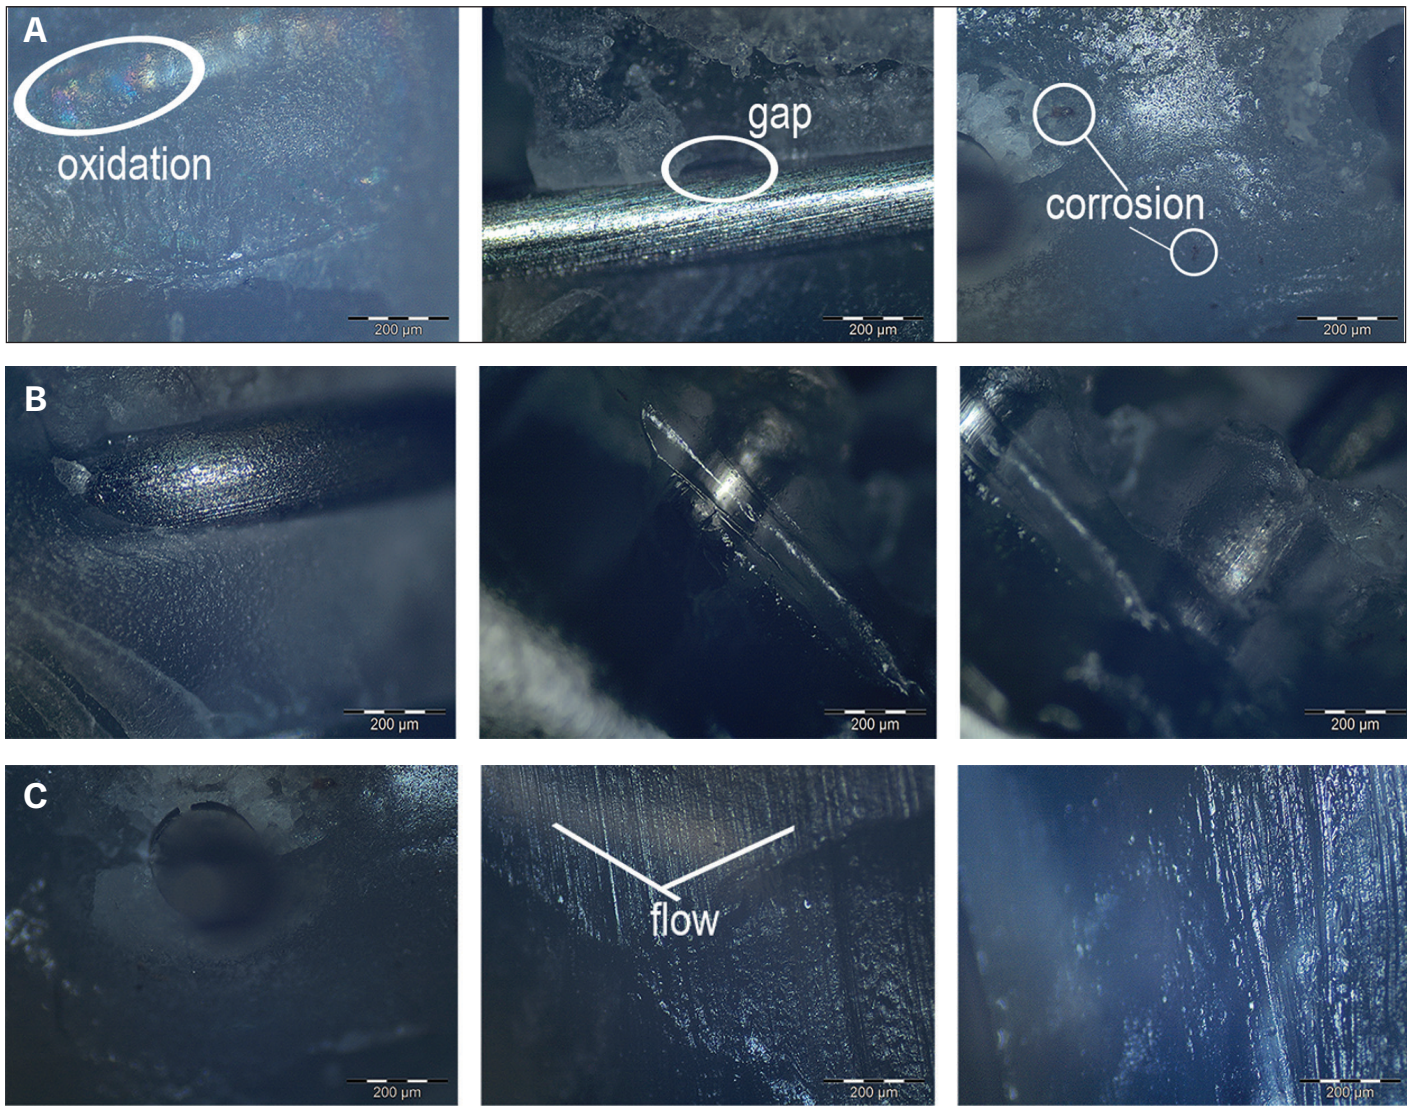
Optical microscope images of welded materials: A – Spiral; B – wavy; C – M-shaped.
